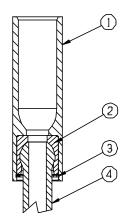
Valve Stem Components 1-Valve Sleeve, 2-Bushing, 3-Snap Ring, 4-Valve Stem
